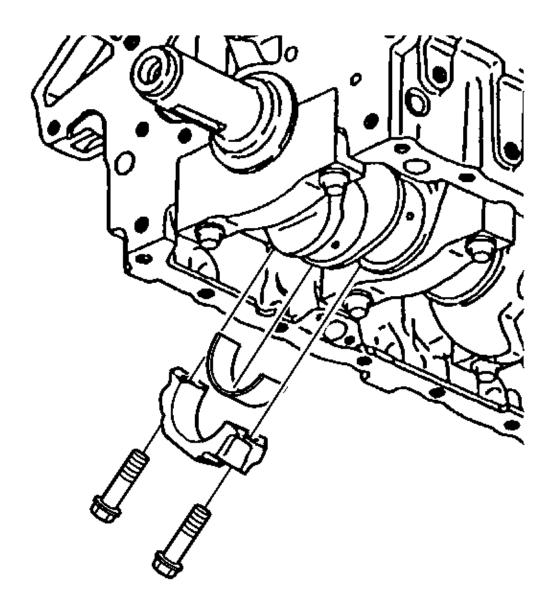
Connecting Rod Cap And Lower Connecting Rod Bearing Courtesy of GENERAL MOTORS CORP.
